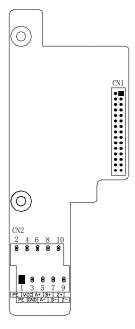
EN-PG01, EN-PG02 Outline dimension drawing
